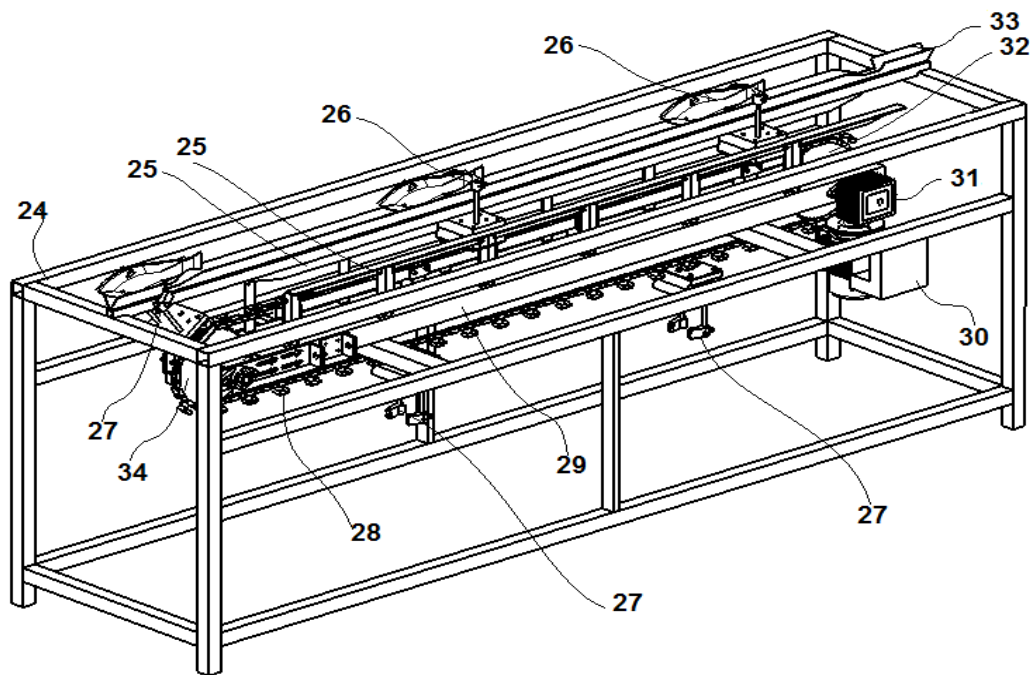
Main chassis of the system, the moving parts, gripper guide, and fish canal
